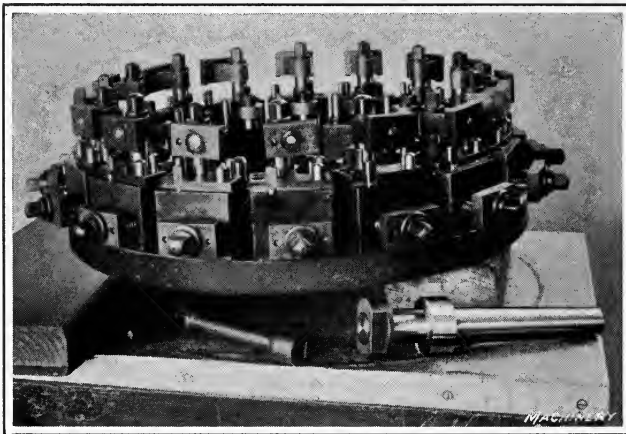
Typical Example of Fixtures used in Continuous Milling Operations for producing Parts in Large Quantities
